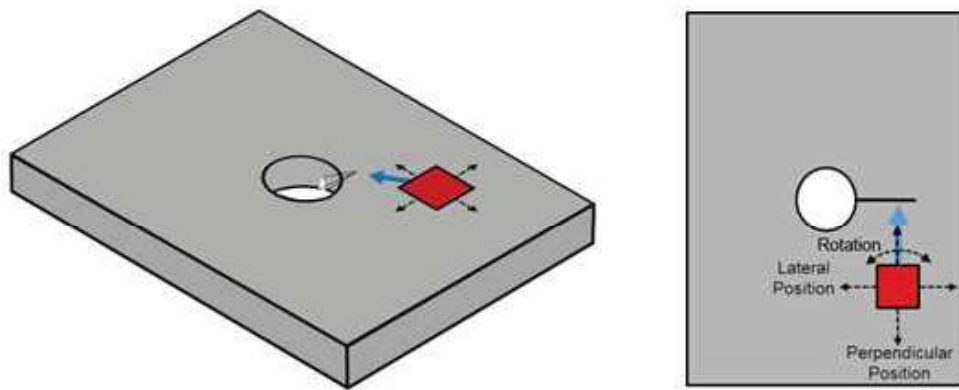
Schematic diagrams of the inspection investigated from a fastener hole: (a) isometric and (b) plan view.
